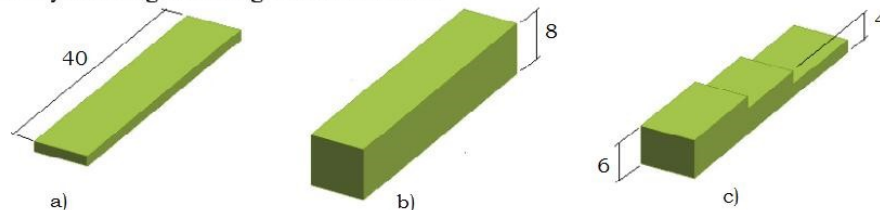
Sample green parts geometries, a) thin part, b) thick part and c) step part.
